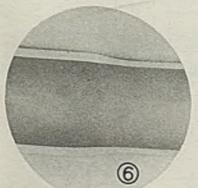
Longitudinal cross section of stainless tube stopped in die. Tube is pulled to right through die and over mandrel in center of photograph allow extra metal for corrosion losses, practically all stainless tubing is sold in the cold drawn state. Welded tubes often are cold drawn both to reduce them in dimensions and to remove the weld bead.
